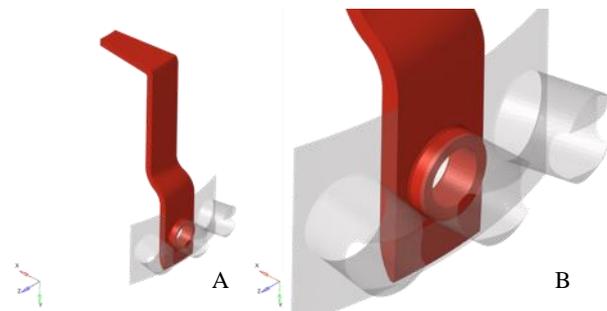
Example model to determinate the failure torque of an plug-in assembly: A general overview; B detailed view on a locking pin
